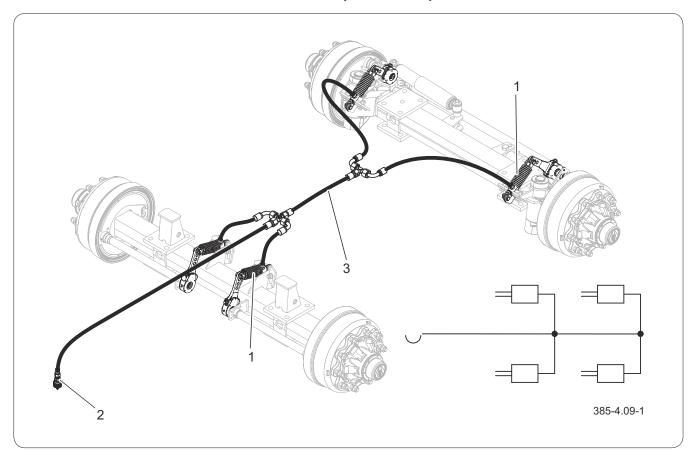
Diagram and structure of the hydraulic braking system (FR) (1) hydraulic cylinder (2) quick connector socket (3) cable
